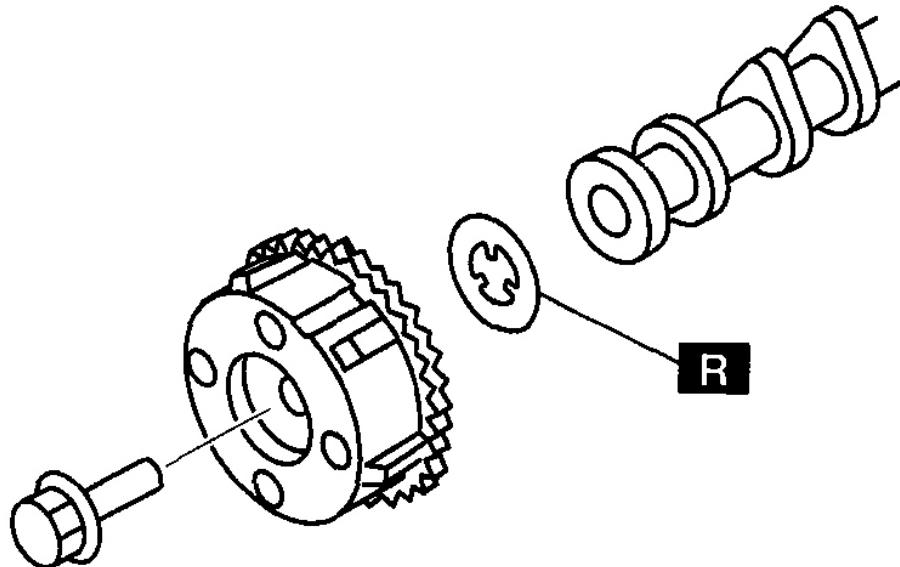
Identifying Mark Camshaft & Variable Valve Timing Actuator
